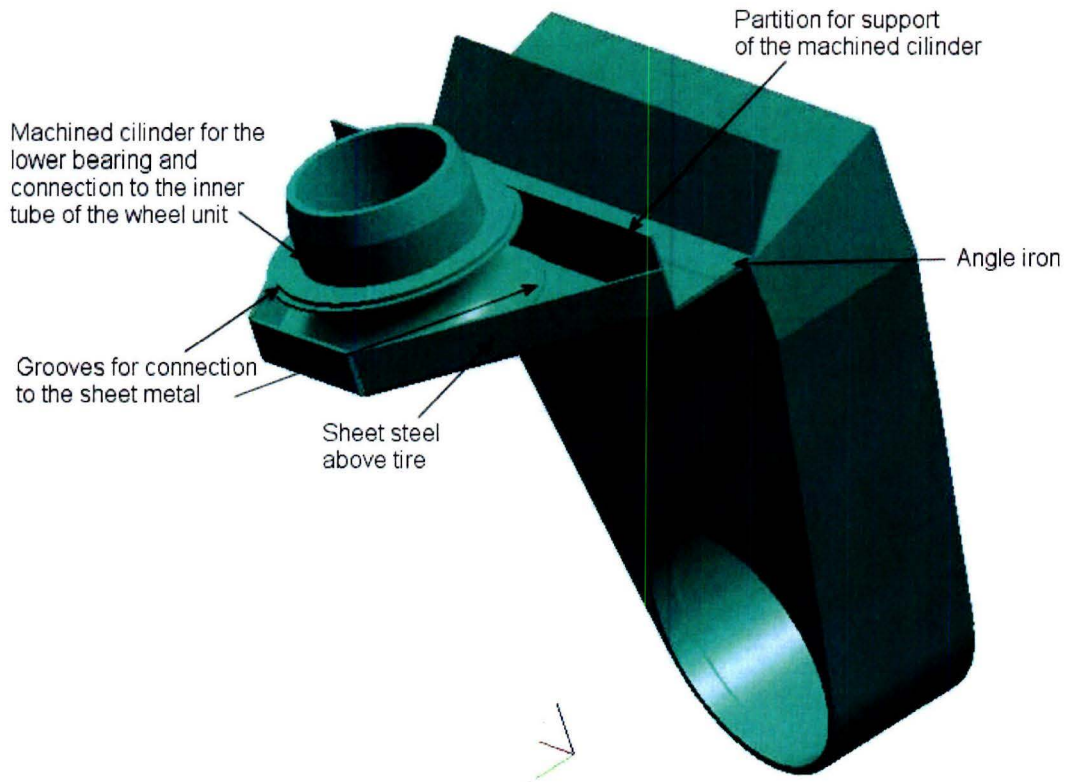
Wheel carrying arm: steel tube with two pieces sheet steel, angle iron, two partitions, lower sheet steel above the tire, machined cylinder and a partition for support of the cylinder.
